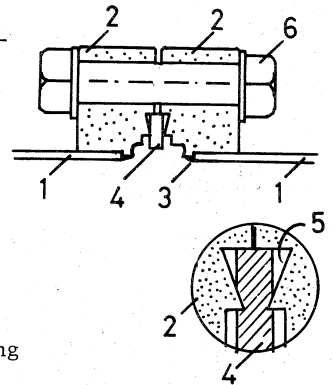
ICF structure conflat type aluminum alloy vacuum flange with metal seal. 1.aluminum alloy pipe (6063-T6), 2. aluminum alloy flange (2219-T87), 3.AC-TIG weld, 4.pure aluminum gasket (1050), 5.CrN treatment, 6.anodized aluminum alloy bolt (2024-T4), nut (6063-T6) and washer (5052).
